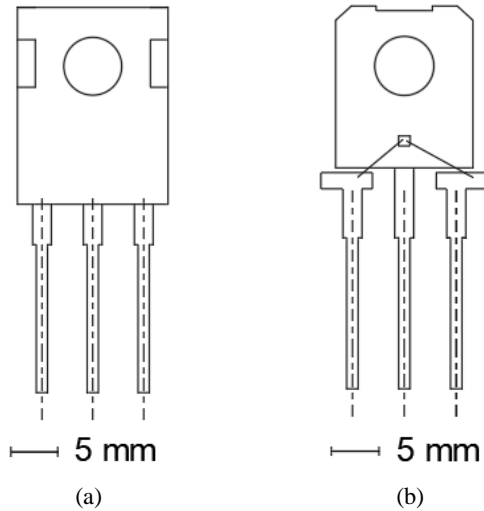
Package dimensions of the C2M0280120D transistor: (a) external dimensions and (b) internal dimensions (view after epoxy mold compound removal).
